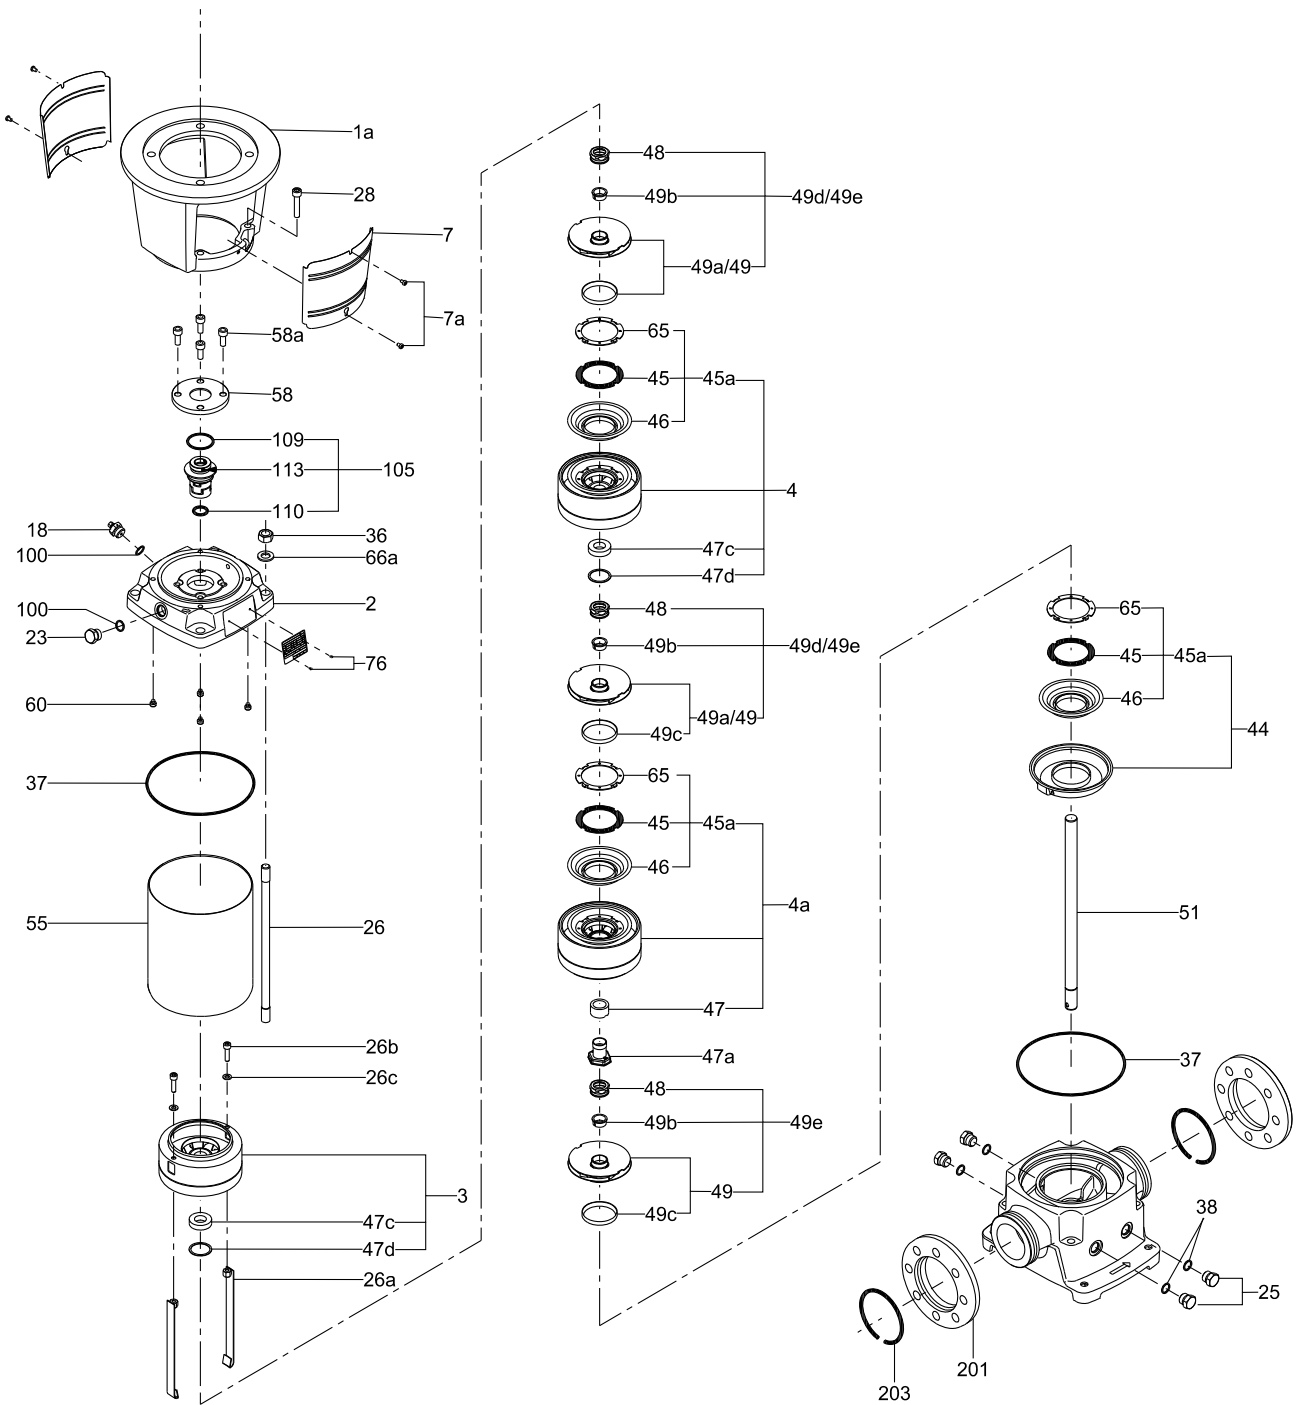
Exploded view (detailed), CR, CRI, CRN 32, model B
